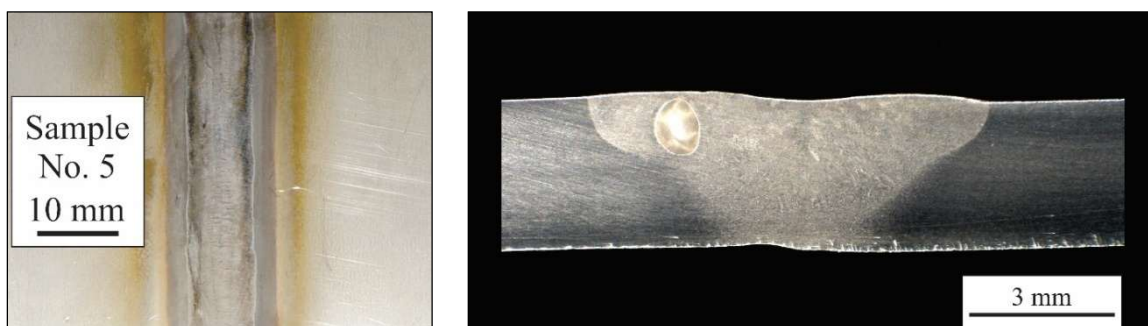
Specimen N° 5 - TAG, 160 A, no filler material
